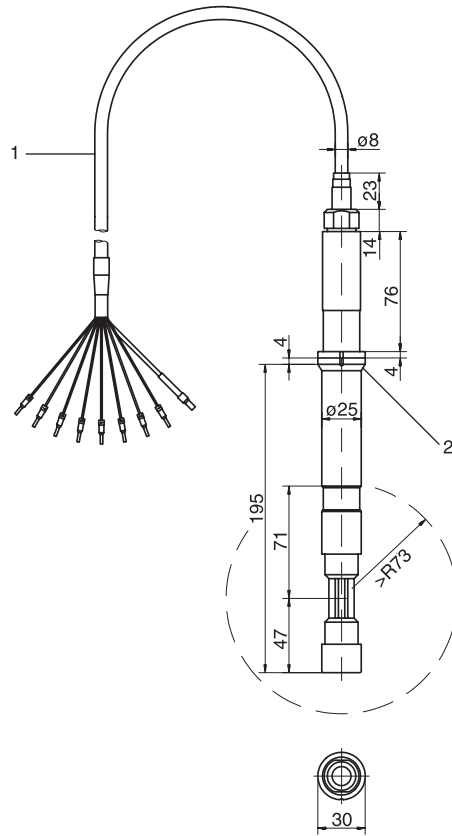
Dimension drawing SE 600 2-electrode sensor
